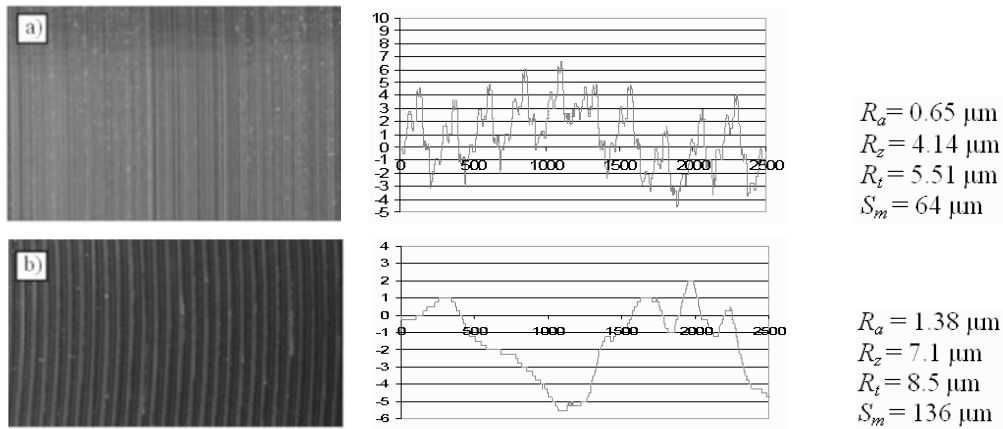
Geometrical structures of Cu sample butting faces prior to cold pressure welding: a) a planed surface, b) a milled surface
